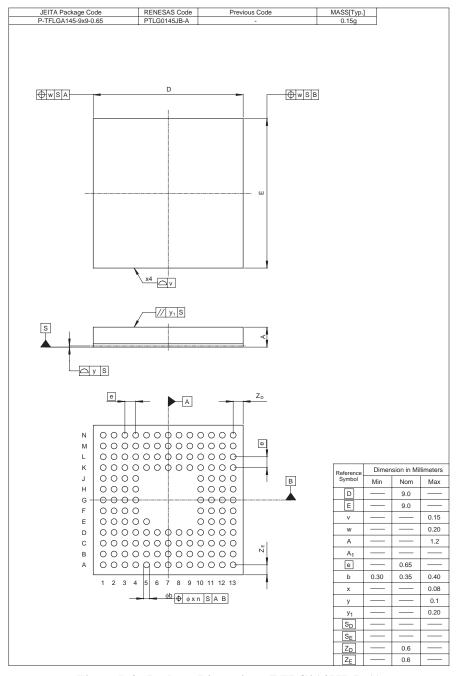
Package Dimensions (PTLG0145JP-B-A)
